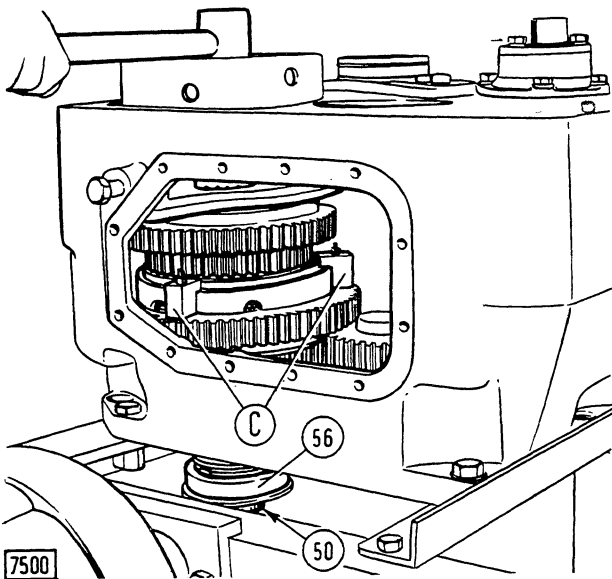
Disassembling high/intermediate speed clutch shaft (50).
